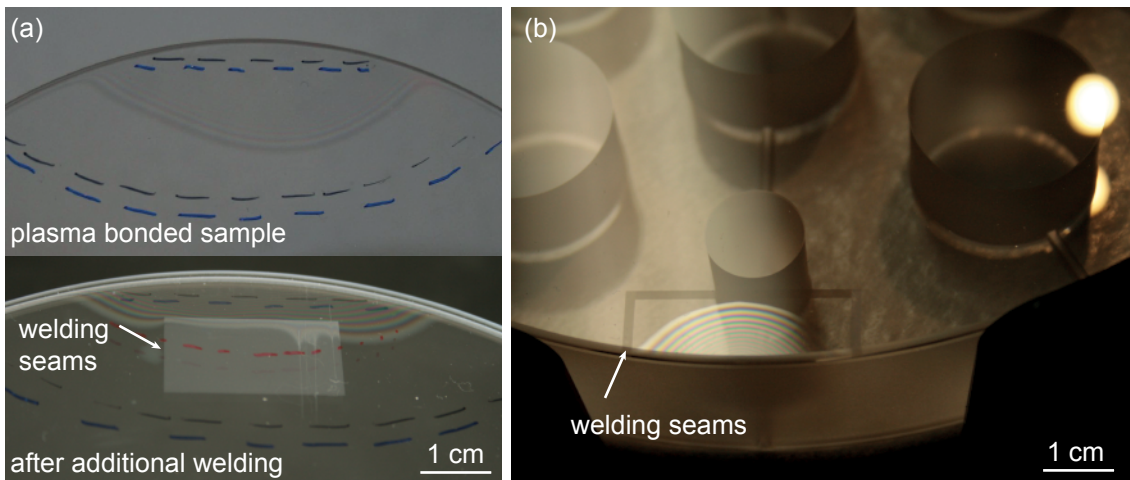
(a) Plasma bonded samples with a non-bonded part. After the inscription of additional welds the interference fringes are reduced and a fracture of the entire sample prevented. (b) Welding seams seal the non-bonded part of plasma bonded ULE samples.
